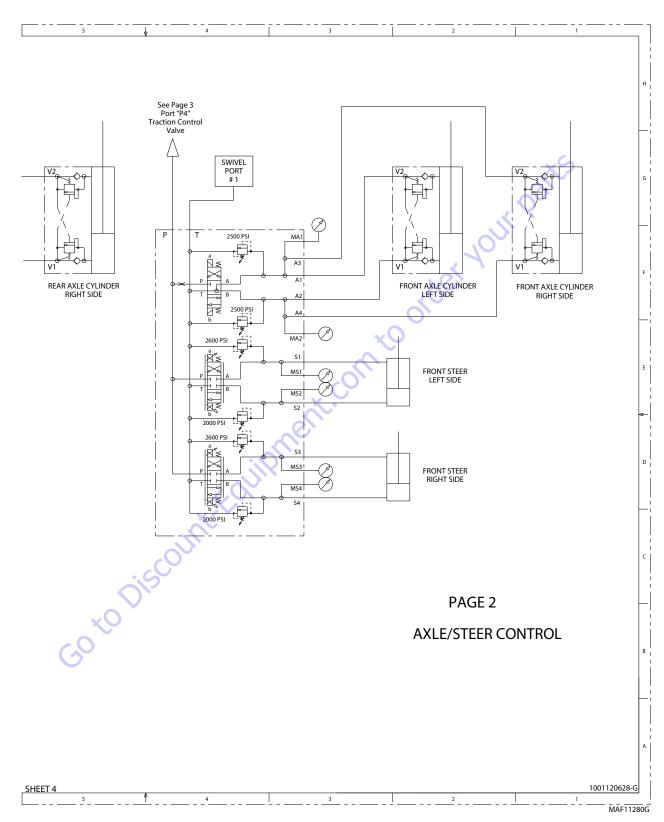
Hydraulic Schematic - Sheet 4 of 10
